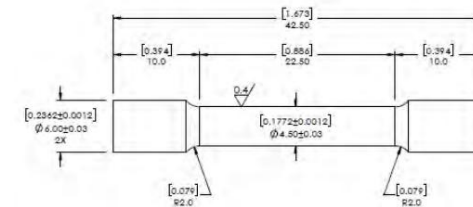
Machined Metal AM (4 mm) Tensile Bar Without Threads
